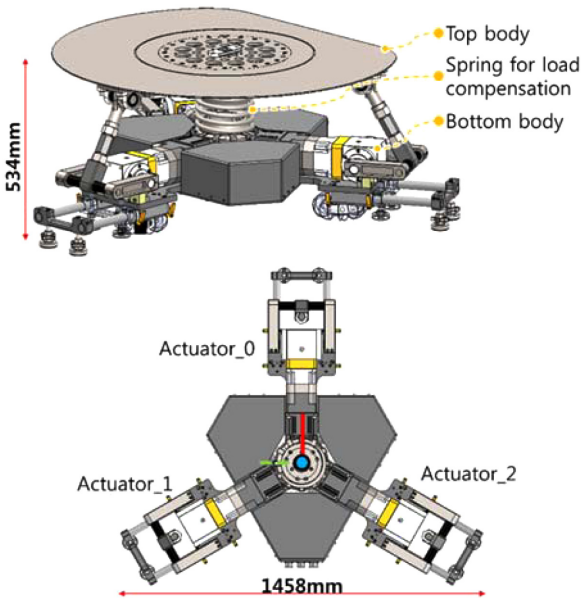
Design of 3-axis motion platform with load compensation mechanism
